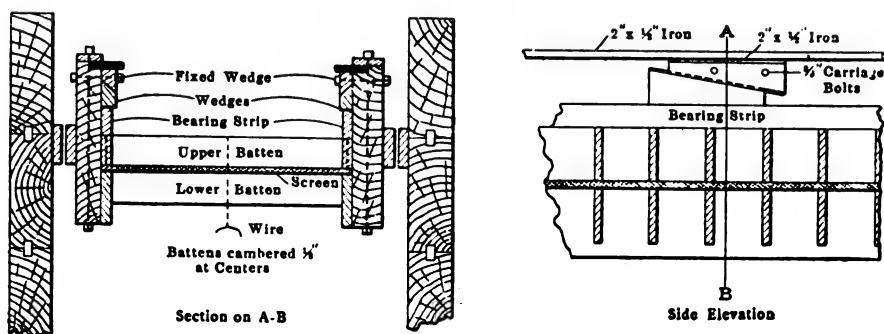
BATTENS AND WEDGING FOR JIG SCREENS.
